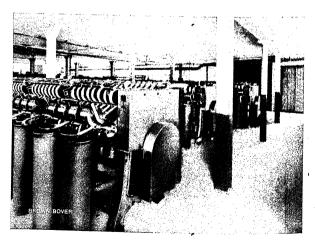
Gear drive of tow-drawing frames by built-in, totally-enclosed squirrel-cage motors.
